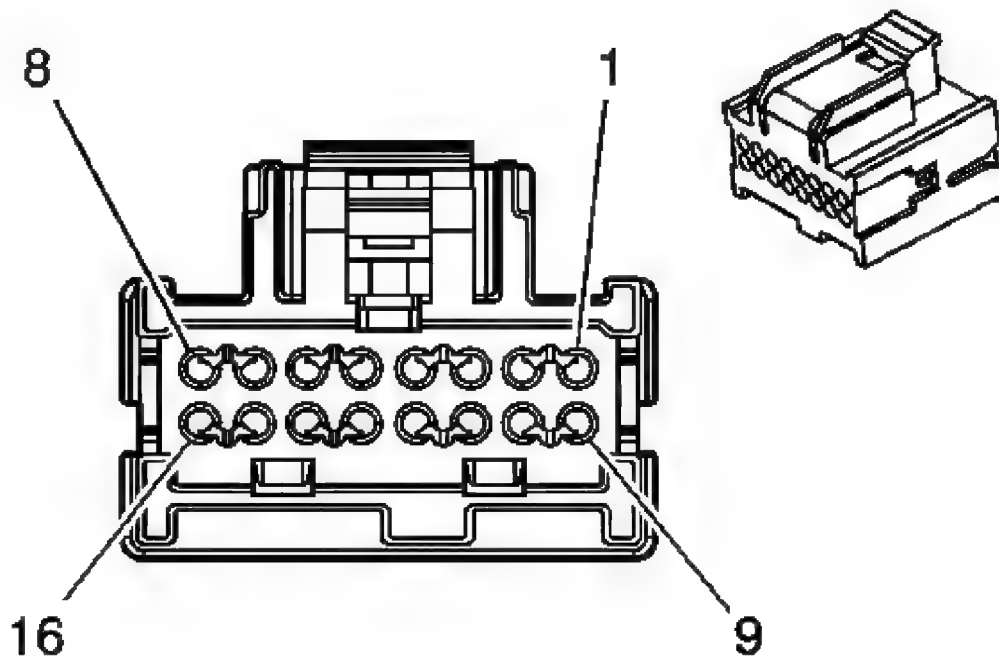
Front Climate Control Seat Module C3 (KB6) Connector End View
